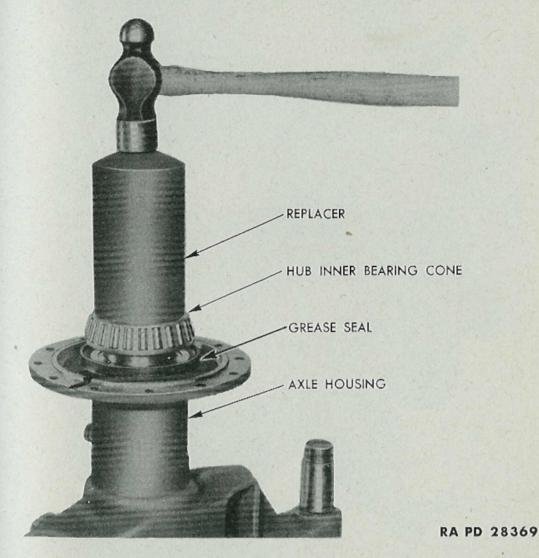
Installing Hub Inner Bearing Cone on Rear of Intermediate
